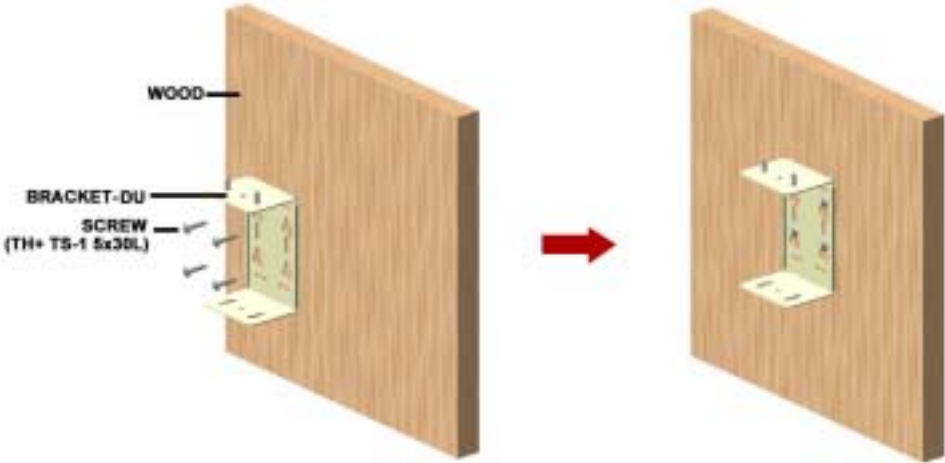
LUMBER WALL MOUNTING MTG BRACKET-DU Connection Sequence
